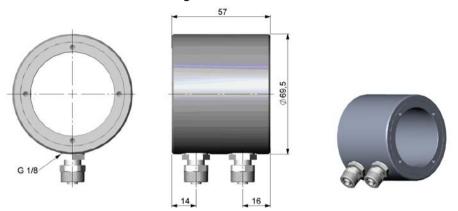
Dimensions water cooled housing [TM-W-CTL], hose connection: 6x8 mm, thread (fitting): G 1/8 inch
